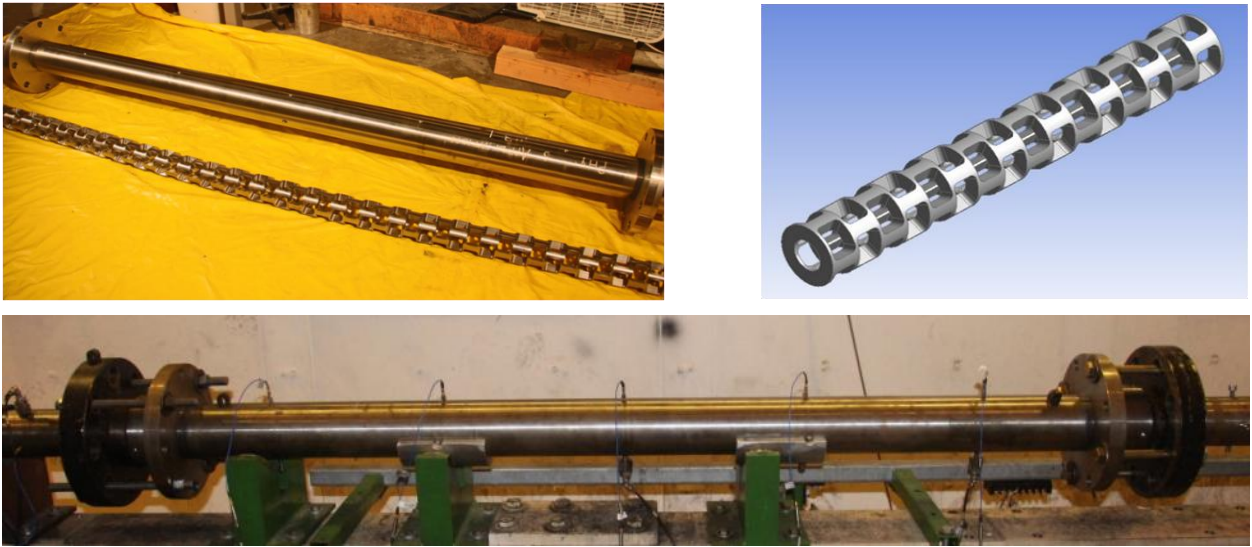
(upper left) BTRA shell tube with 56 baffle chambers; (upper right) isometric view of baffle insert; (bottom) 2-m-long BTRA installed in ram accelerator test section.
